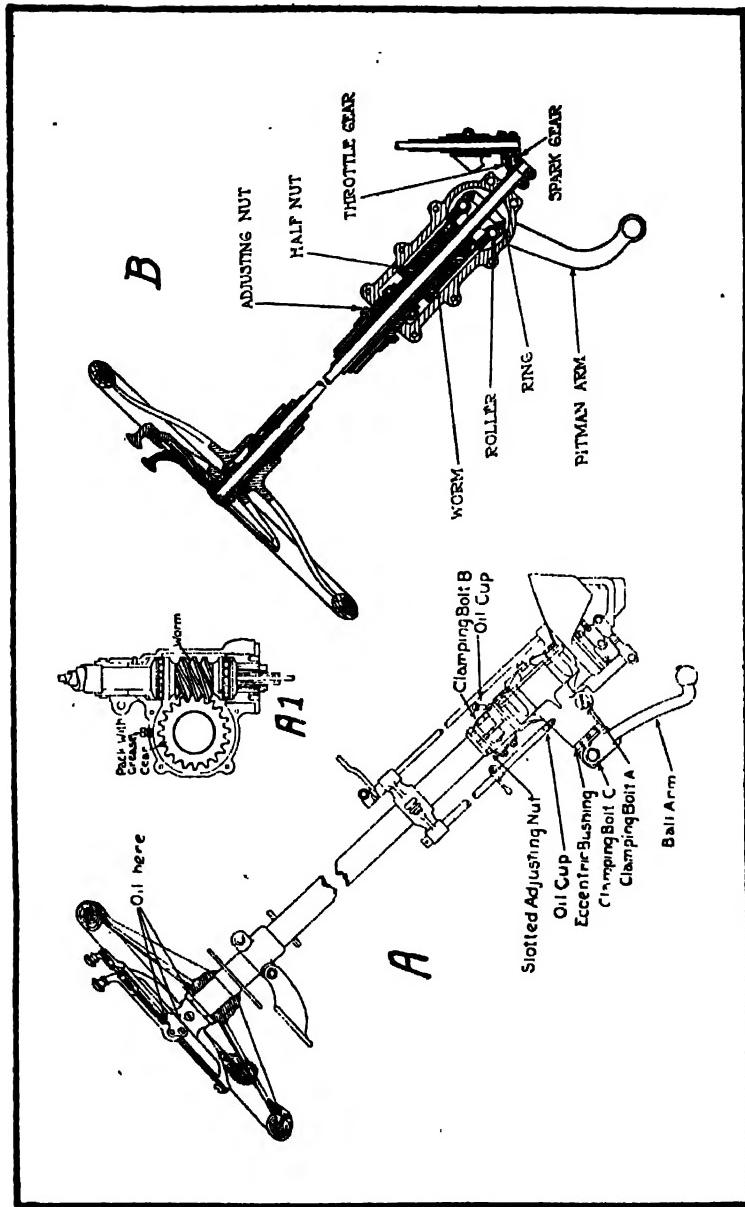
Outlining Construction of Typical Steering Gears. A.—Worm and Sector Type. B.—Screw and Nut Pattern.
